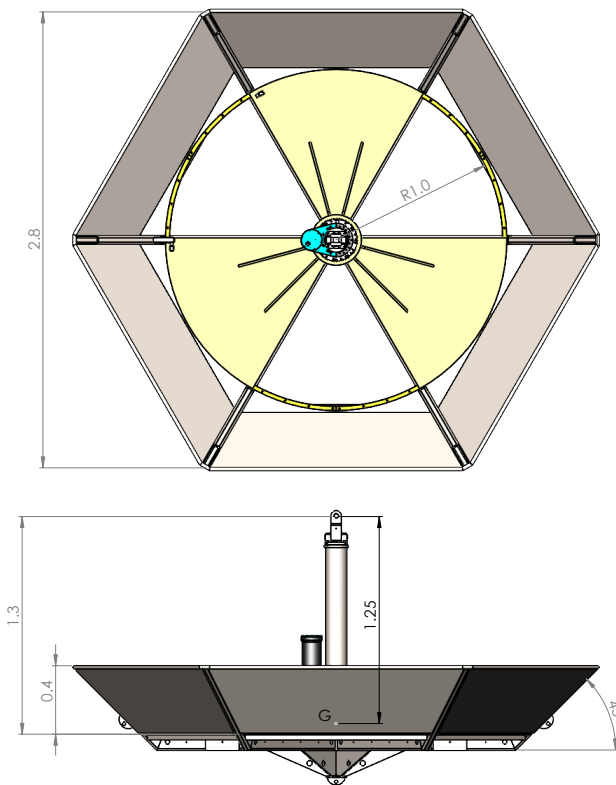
MBARI-WEC heave cone layout drawing with top and side views.
